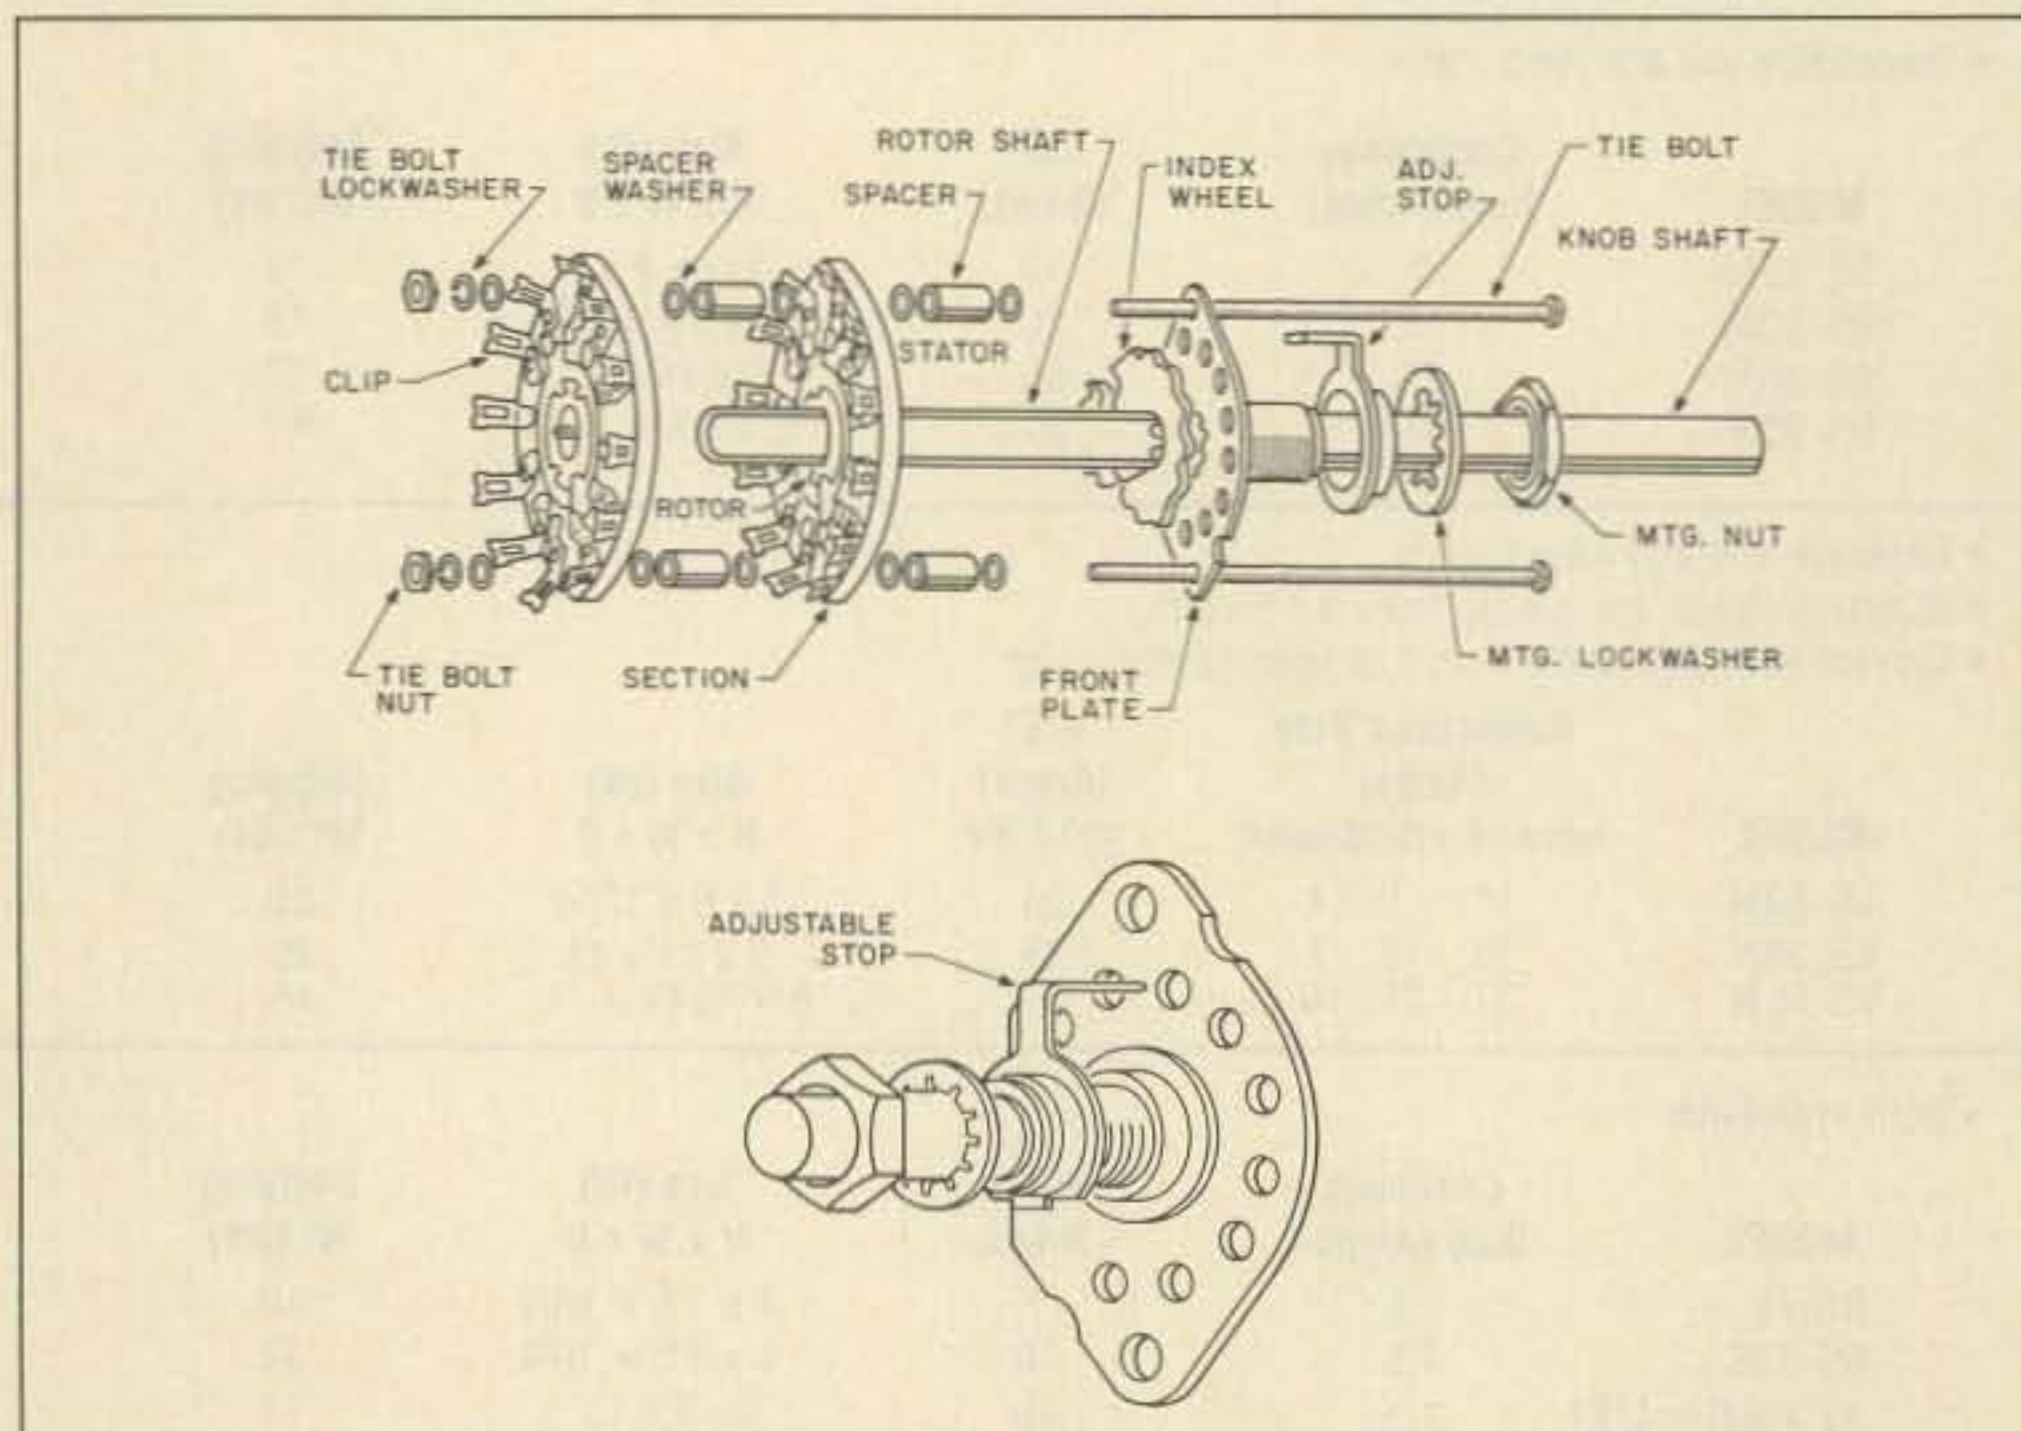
Exploded view of the 1400- and 2500-series standard rotary switch.
